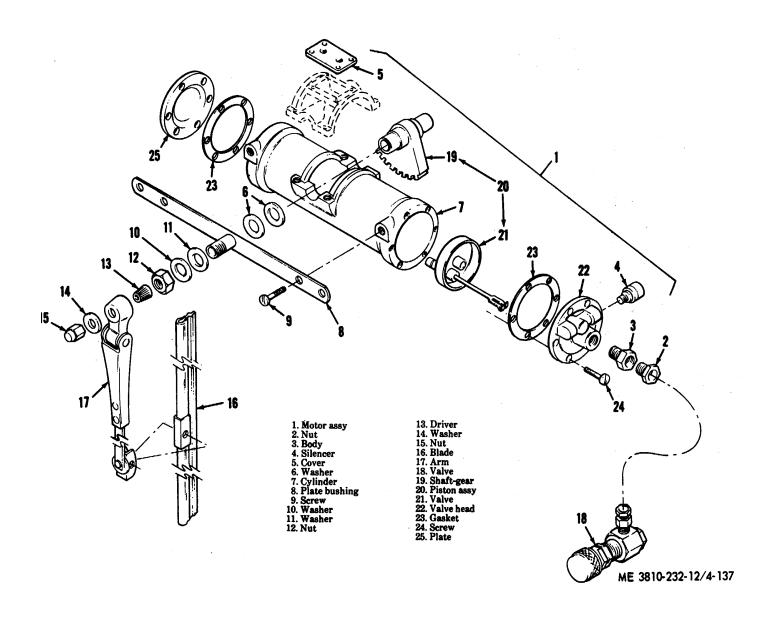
Windshield wiper motor, disassembly and reassembly.
